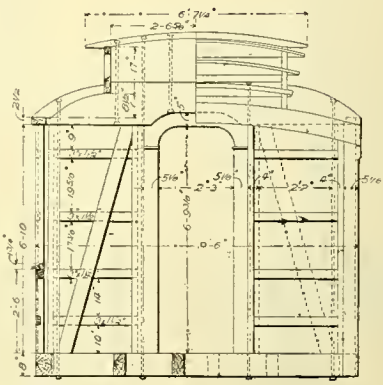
Half Cross Section and Half End Elevation, showing Framing.
